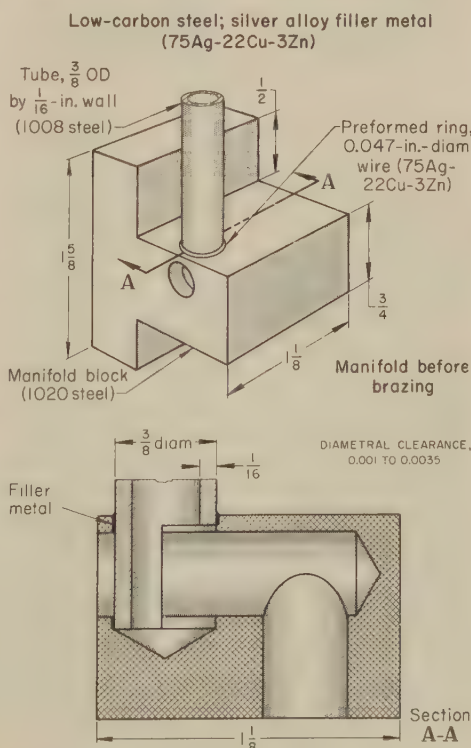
Manifold assembly that was furnace silver brazed, using a protective atmosphere of dissociated ammonia and no flux (Example 563)
